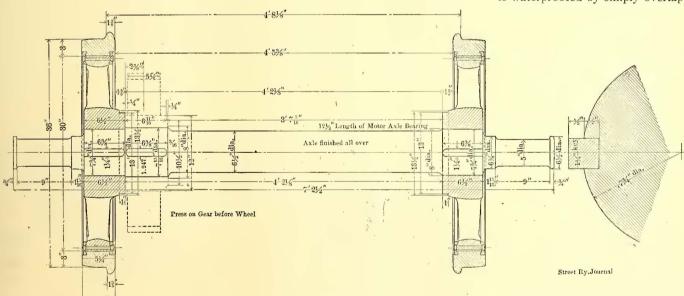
SECTION OF WHEELS AND AXLE ON MOTOR TRUCK
